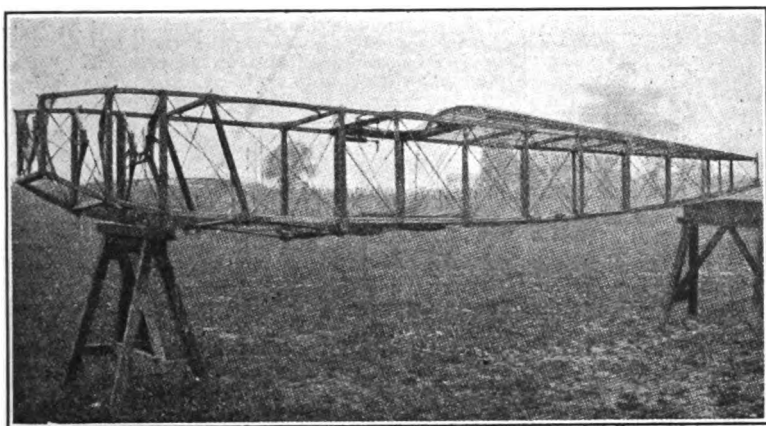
BRACED N. GIRDER FUSELAGE. FAIREY.
